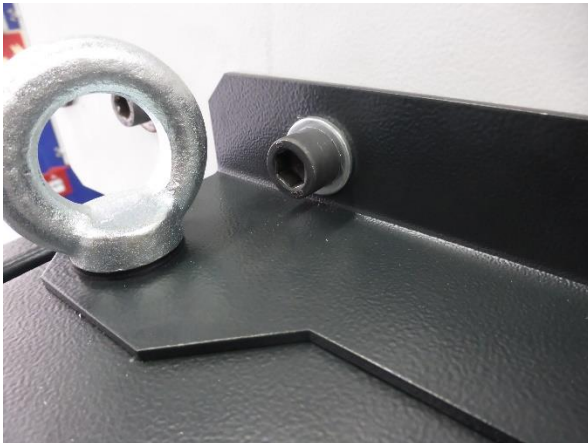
/ condition after testing. Jack ring (DIN580) and hexagon socket (M12)
